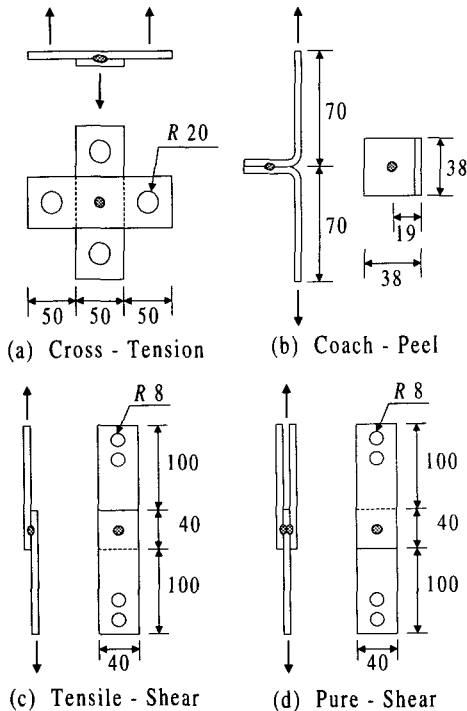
Geometry, dimension and loading mode of 4 types of spot welds (unit: mm)
